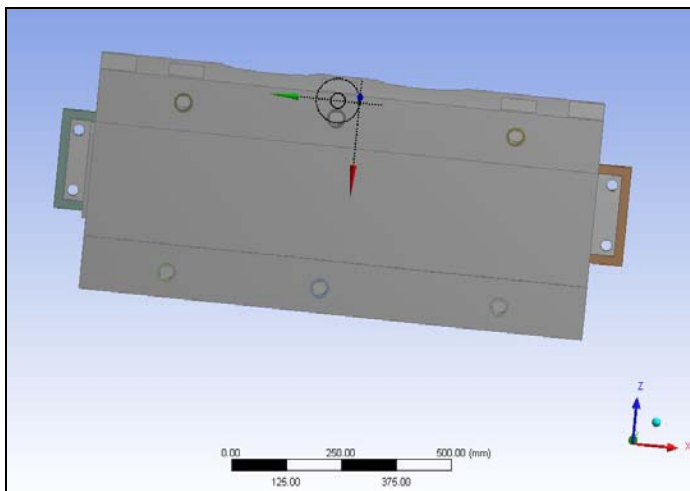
Bolt radius to support (bottom view of gearbox casing)
